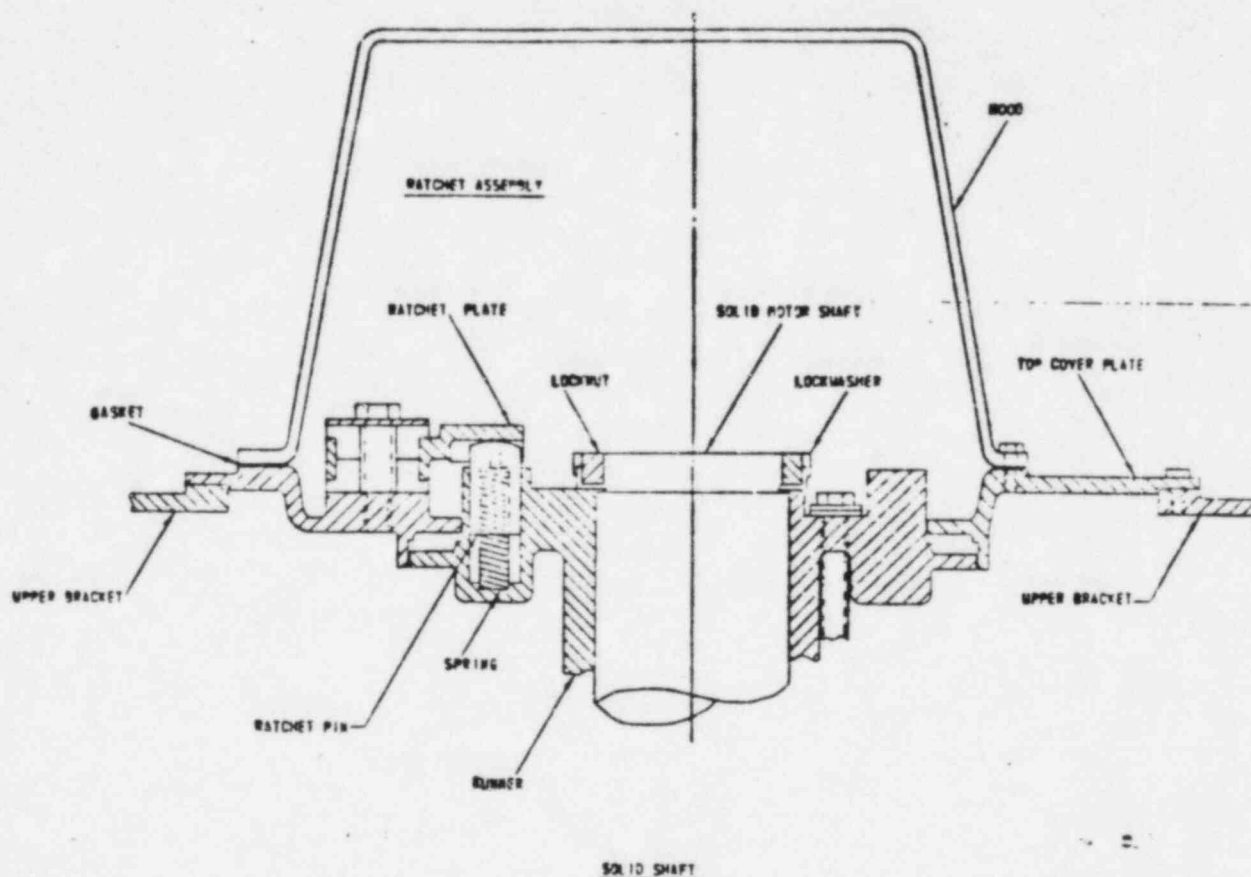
Upper end of typical high thrust solid shaft motor with ratchet.
